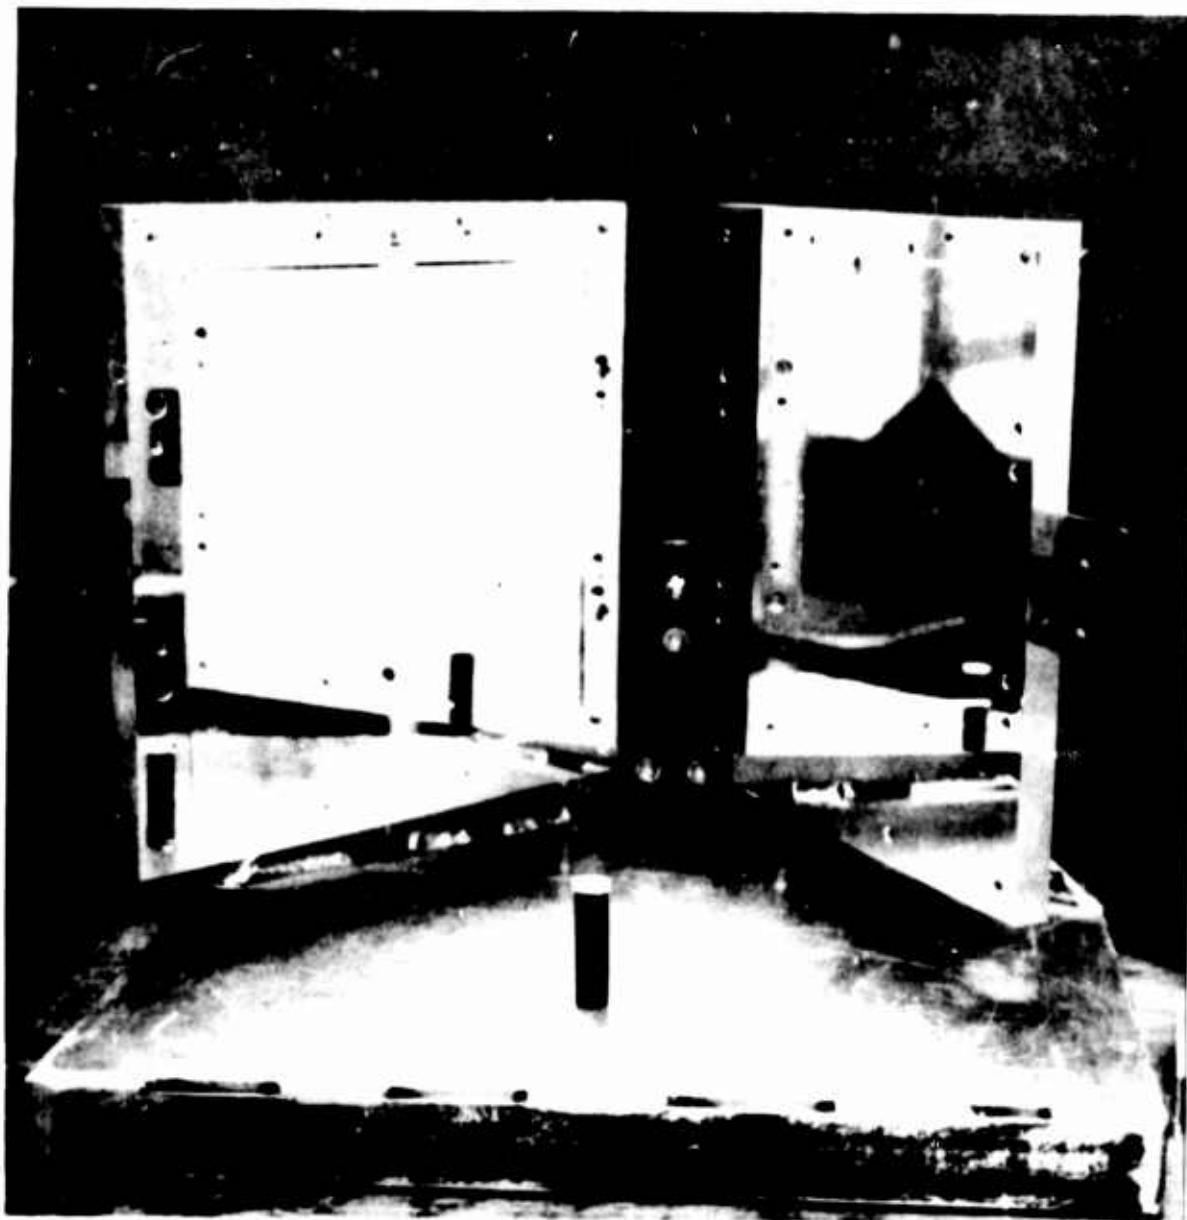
Sheet Mold; Dimensions of the Rubber Sheet are: 12" x 12" x 0.1".
